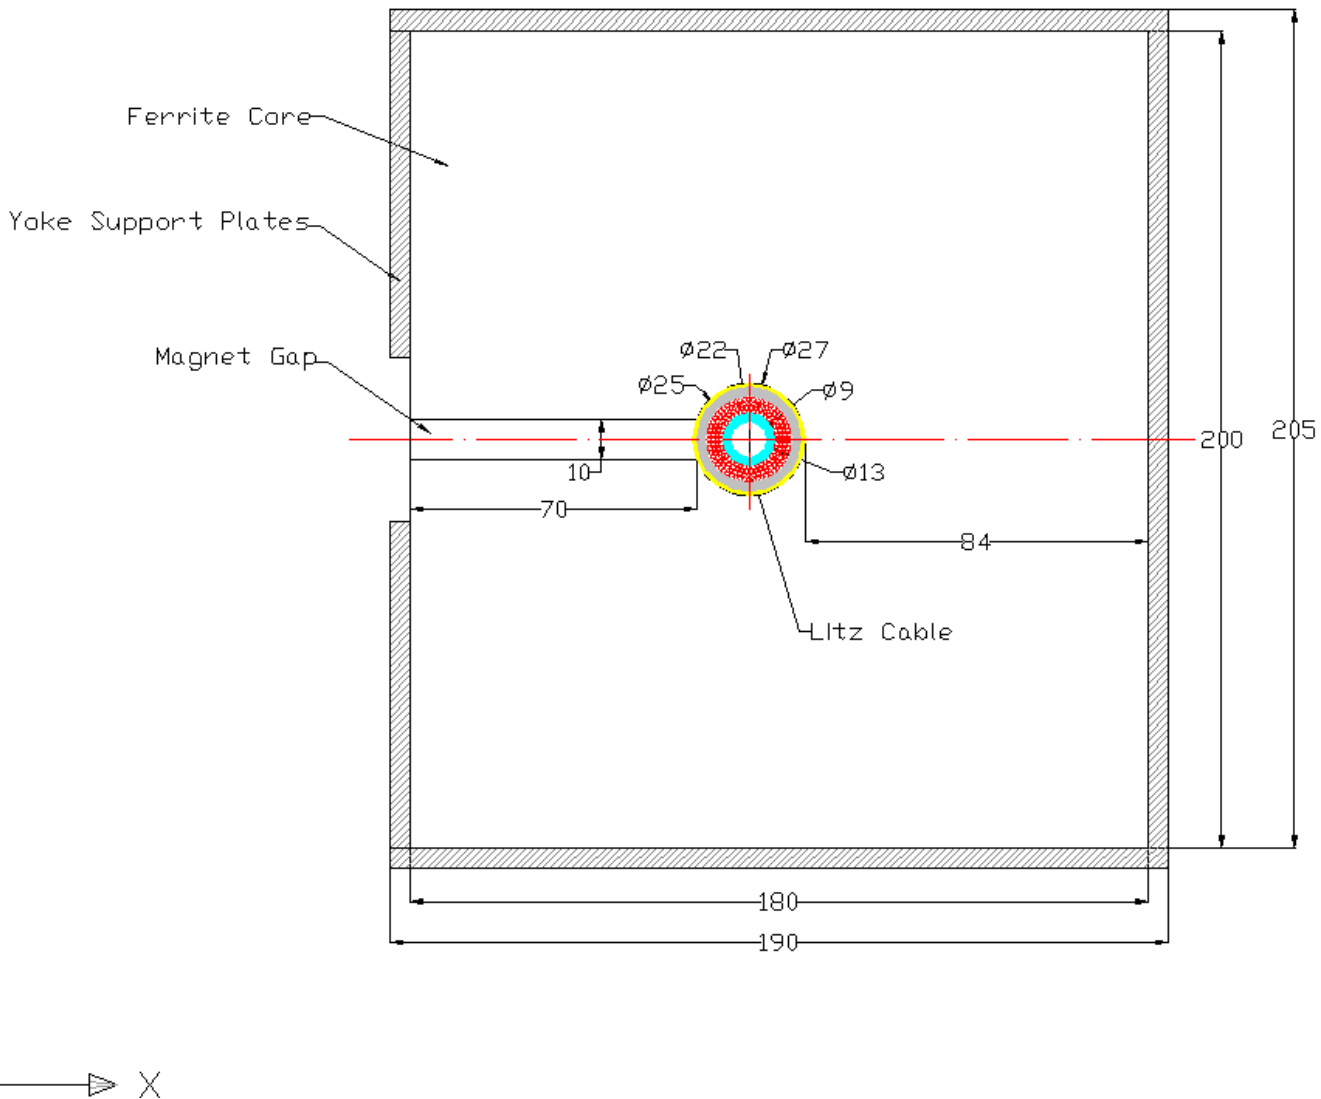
Dipole magnet cross-section. All dimensions in mm.
